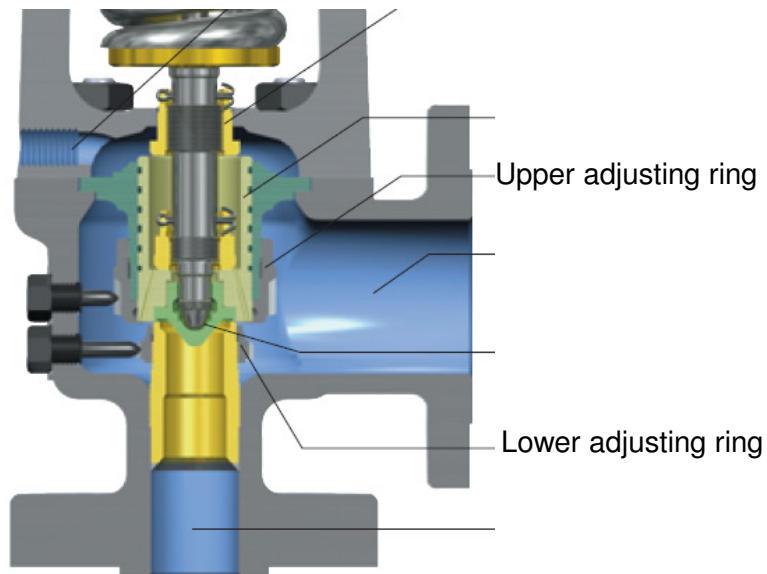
Typical ASME I safety valve design with two adjusting rings
